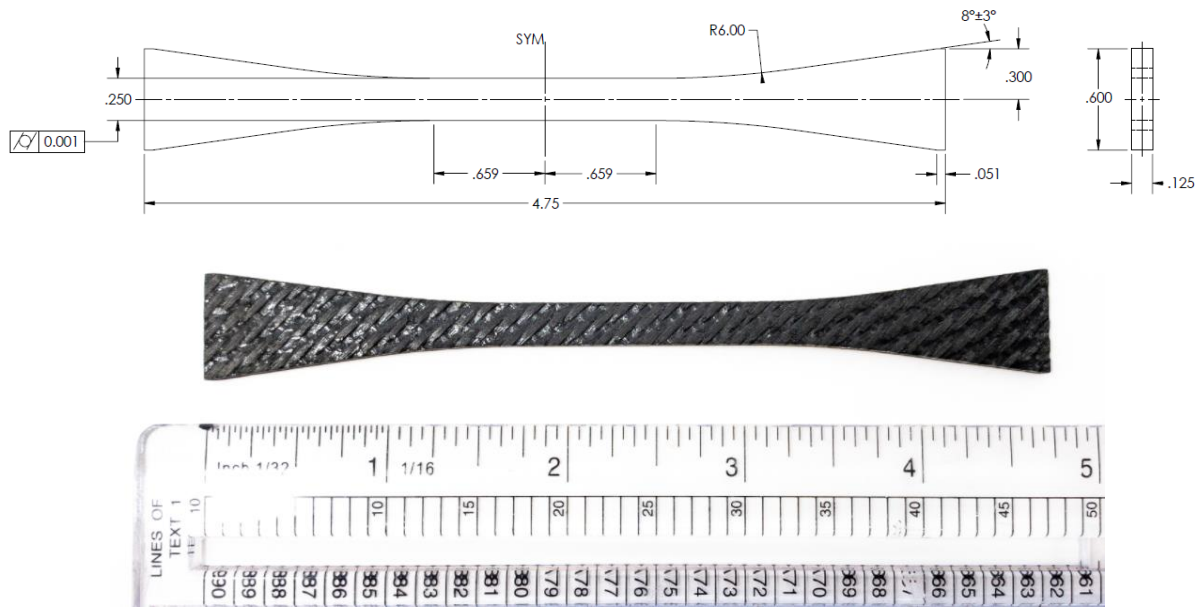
Tensile Test Specimen Geometry/Dimensions (top) and Specimen (bottom).
